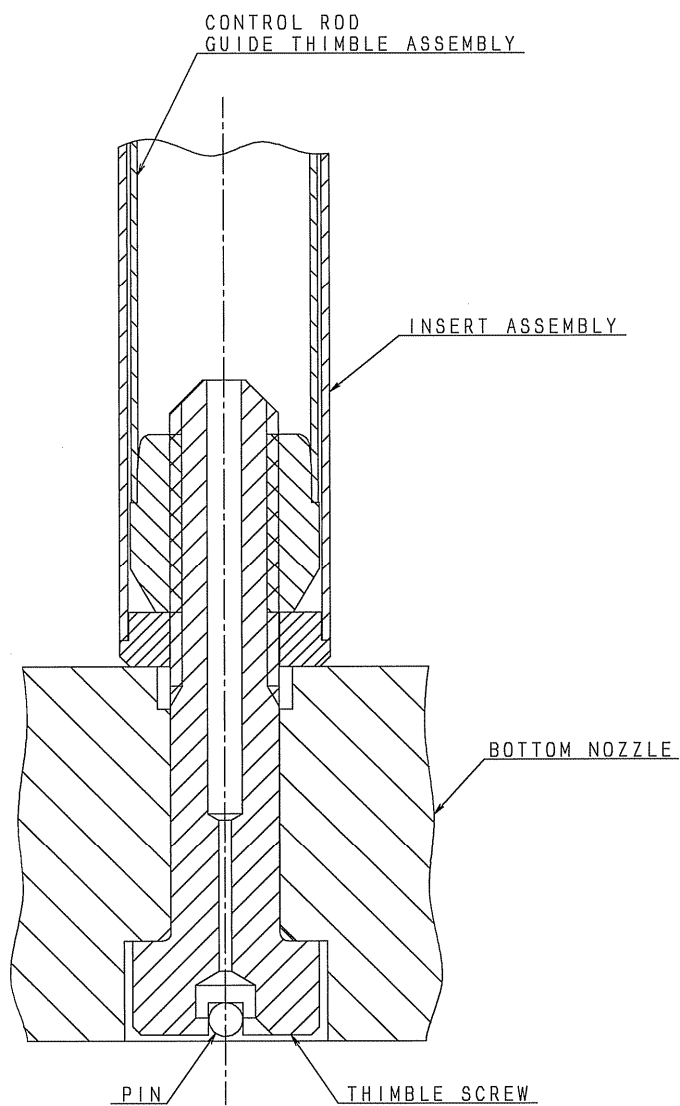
Control Rod Guide Thimble to Bottom Nozzle Joint
